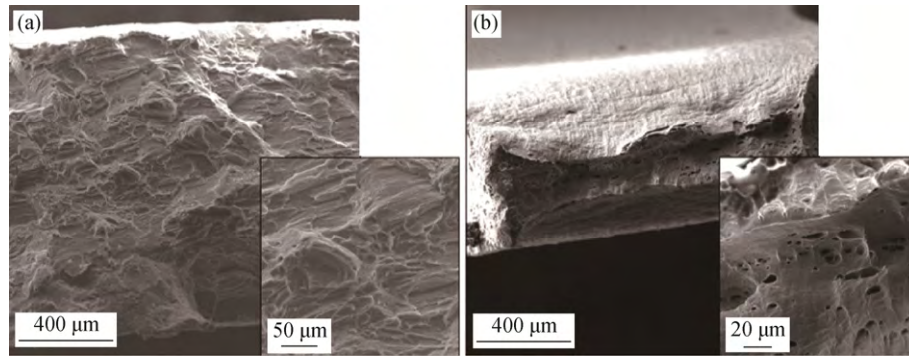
Tensile fracture surfaces of the initial sheets before the ARB process: (a) Mg; (b) Cu.
